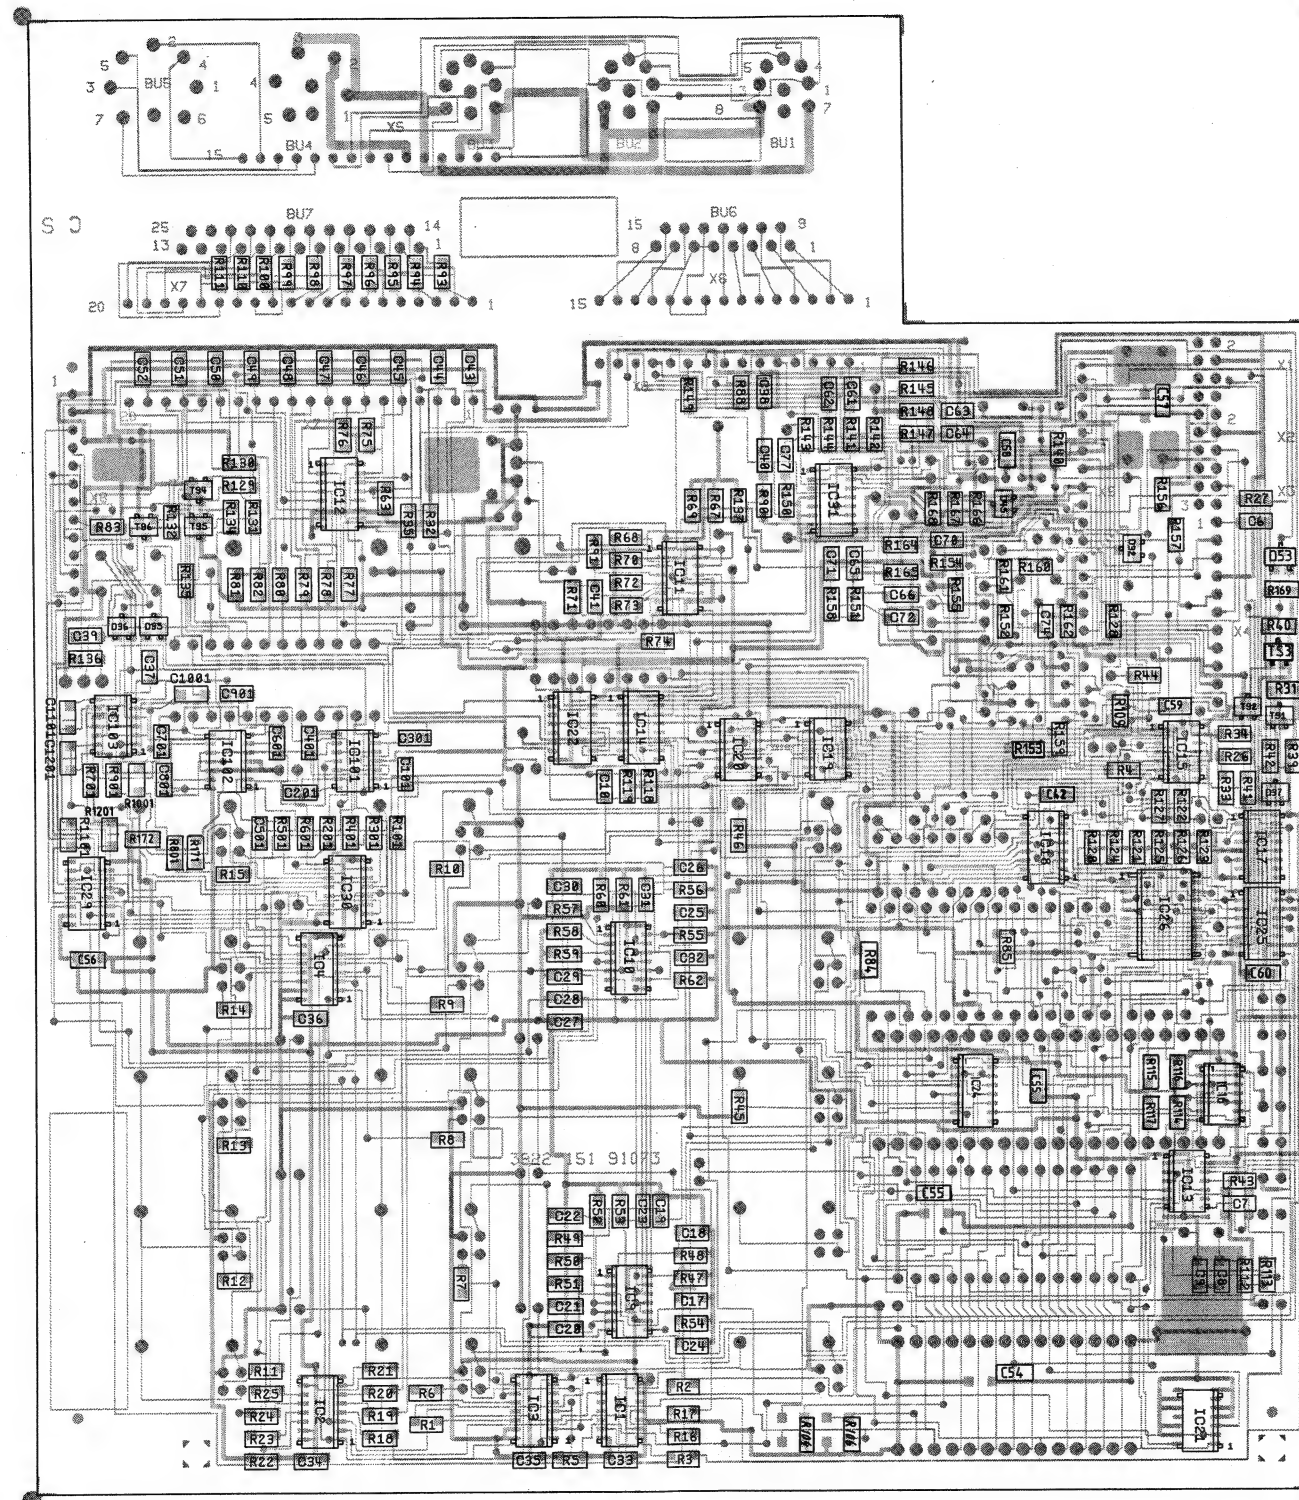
ASSEMBLY DIAGRAM OF UP/SWITCH BOARD, BOTTOM SIDE
